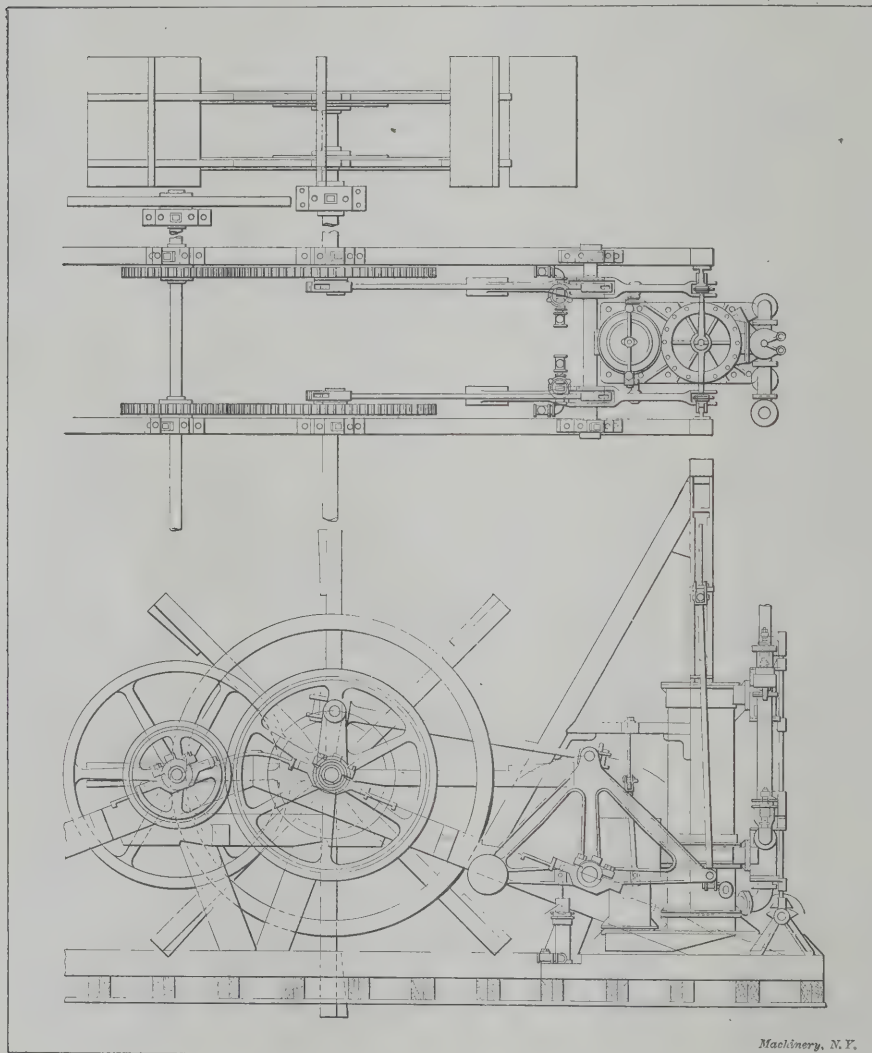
Plan and Elevation of the Engine which was built for the new *Clermont
